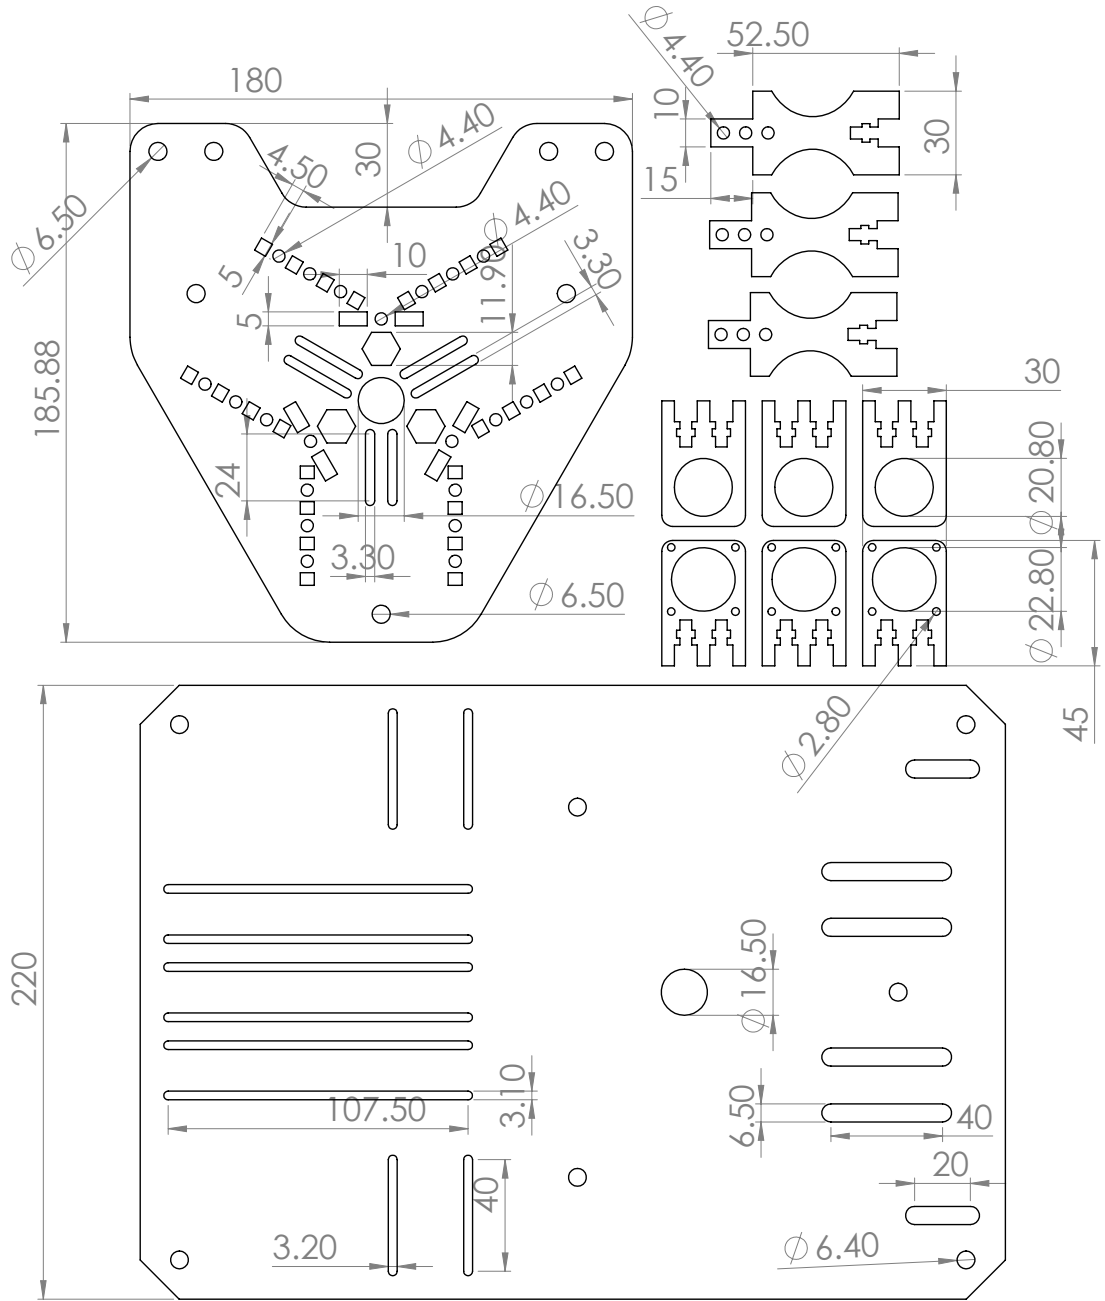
Dimensions of all laser cut parts in the FU (mm). Final prototype.
